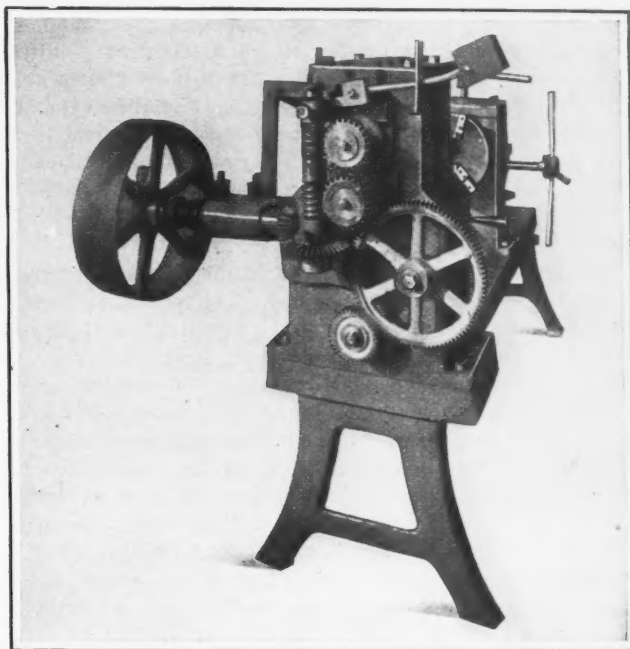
End View of Merer Embossing Machine shown in Fig. 1
